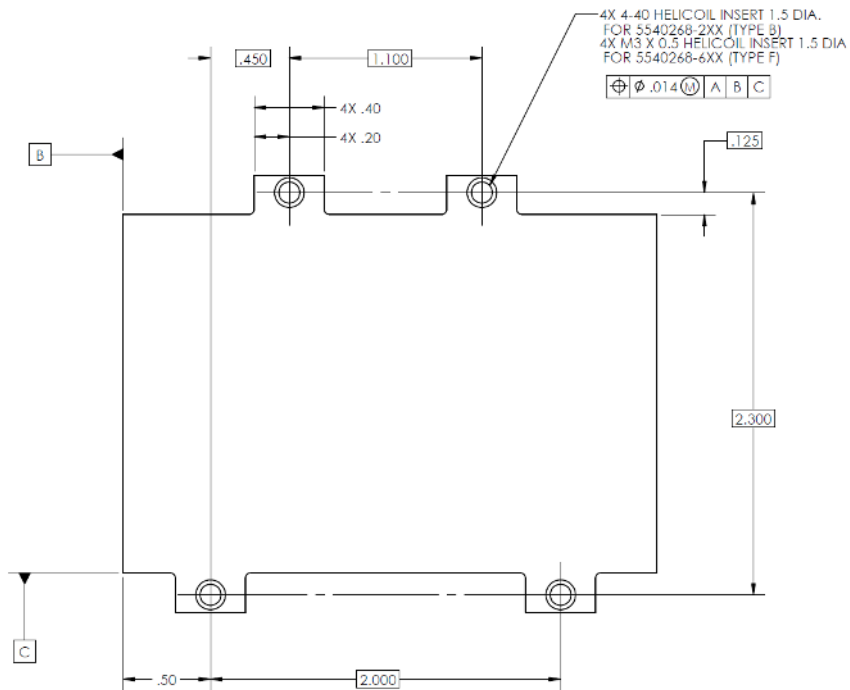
Axial Pins and Threaded Tabs Package Bottom View
